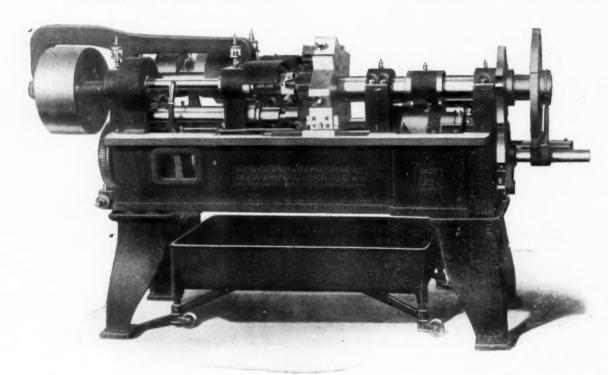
PRENTICE MULTIPLE SPINDLE TURRET MACHINE. MADE BY THE NEW BRITAIN MACHINE COMPANY, NEW BRITAIN, CONN.
